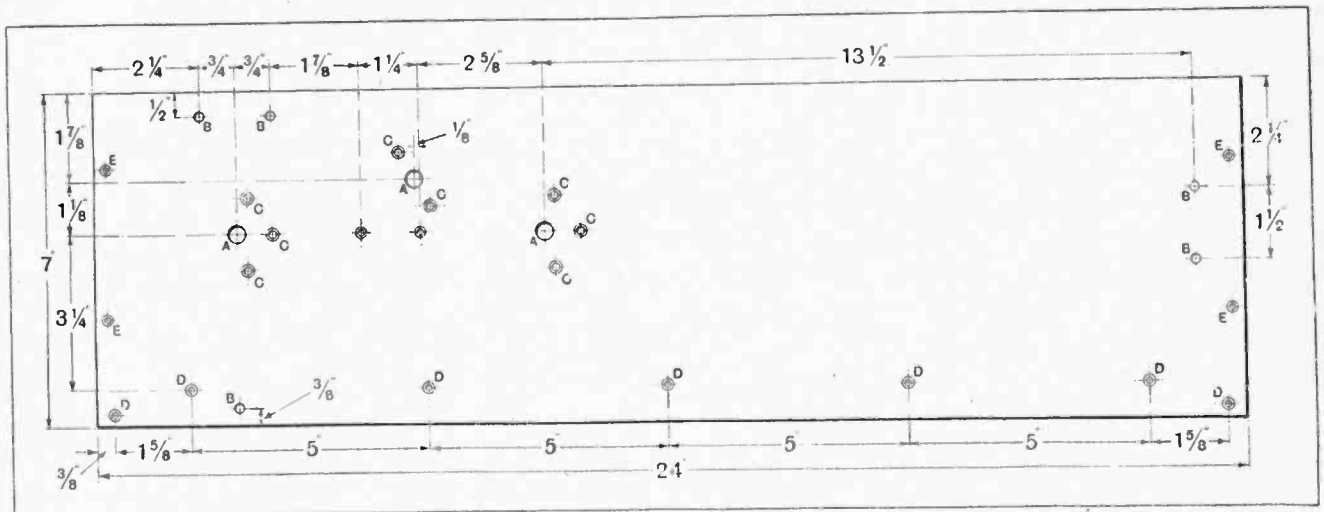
Drilling details of the front panel. Sizes of holes : A, 3/8in. B, 7/32in. C, 5/32in. countersunk for No. 4B.A. screws. D, 1/8in. countersunk for No. 4 wood screws. E, 1/8in. countersunk for No. 6B.A. screws. The condenser holes are carefully set out with the aid of the template supplied.
